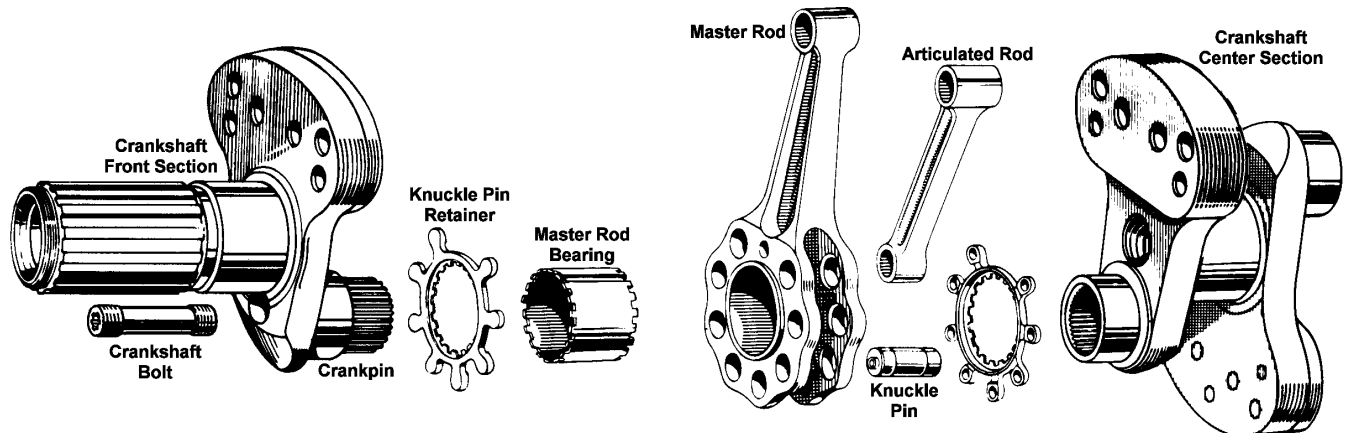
Radial Engine Crankshaft Showing Master/Articulated Rod Construction (Pratt & Whitney)
